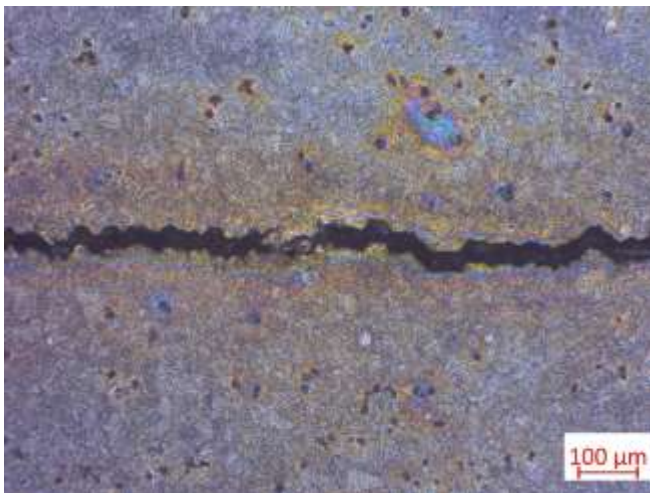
Cracks generated on the welded sample after quenching heat treatment
